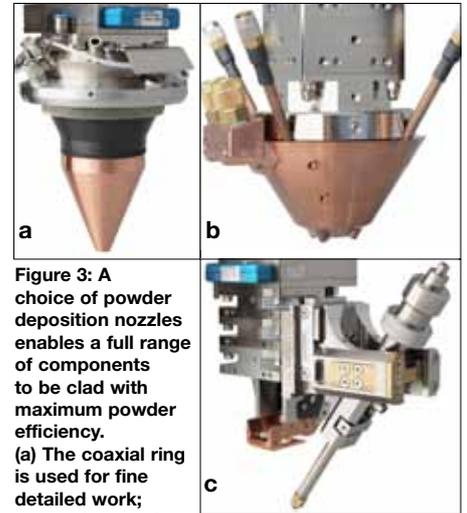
A choice of powder deposition nozzles enables a full range of components to be clad with maximum powder efficiency. (a) The coaxial ring is used for fine detailed work; (b) The four port (discontinuous coaxial) nozzle enables all positional cladding; (c) The off-axis nozzle is used where process robustness is required e.g. for beam-on times of several hours.
